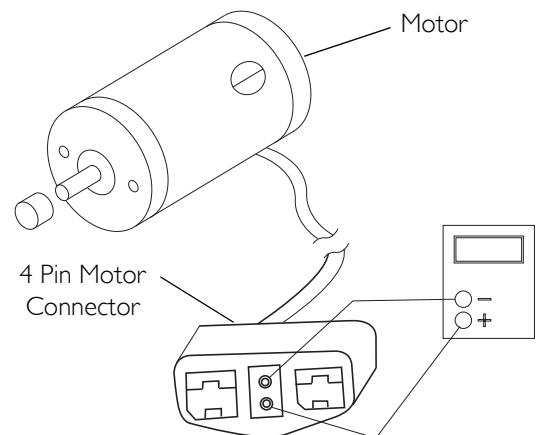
Electro-Mechanical Parking Brake Testing
